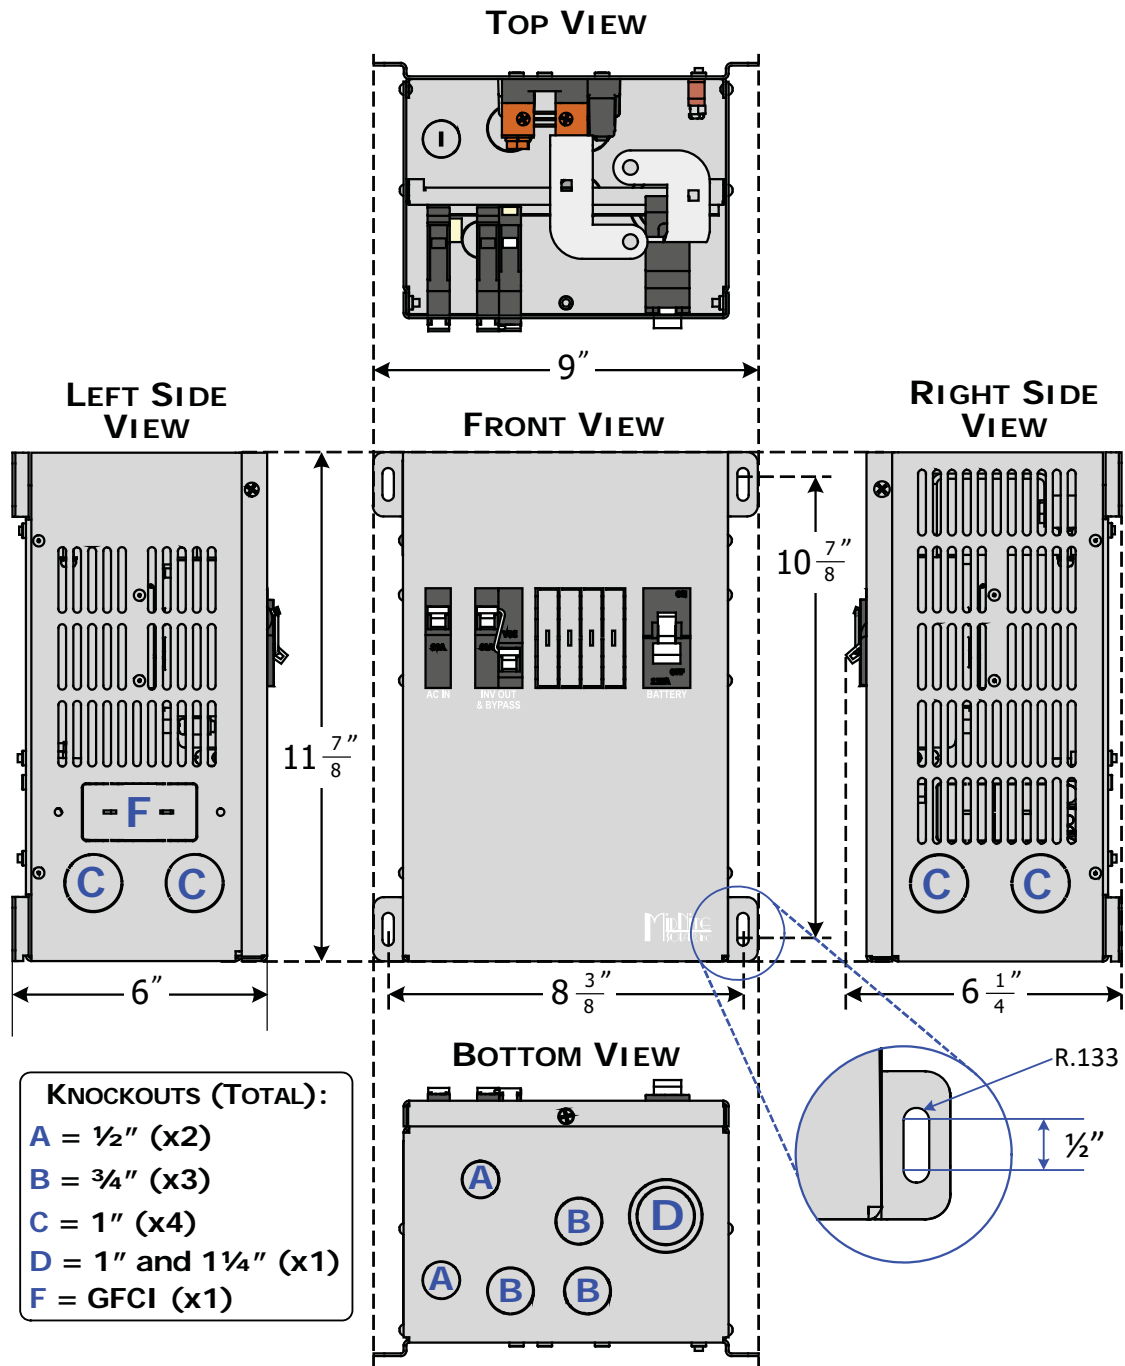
, LR-BB Dimensions and Conduit Knockouts
